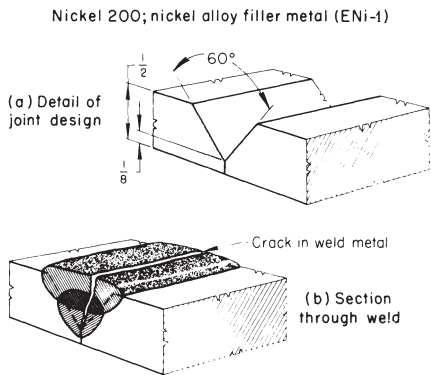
Joint configurations for welding 13 mm (1/2 in.) Nickel 200 and subsequent crack in weld metal caused by excessive heat input. Dimensions given in inches
